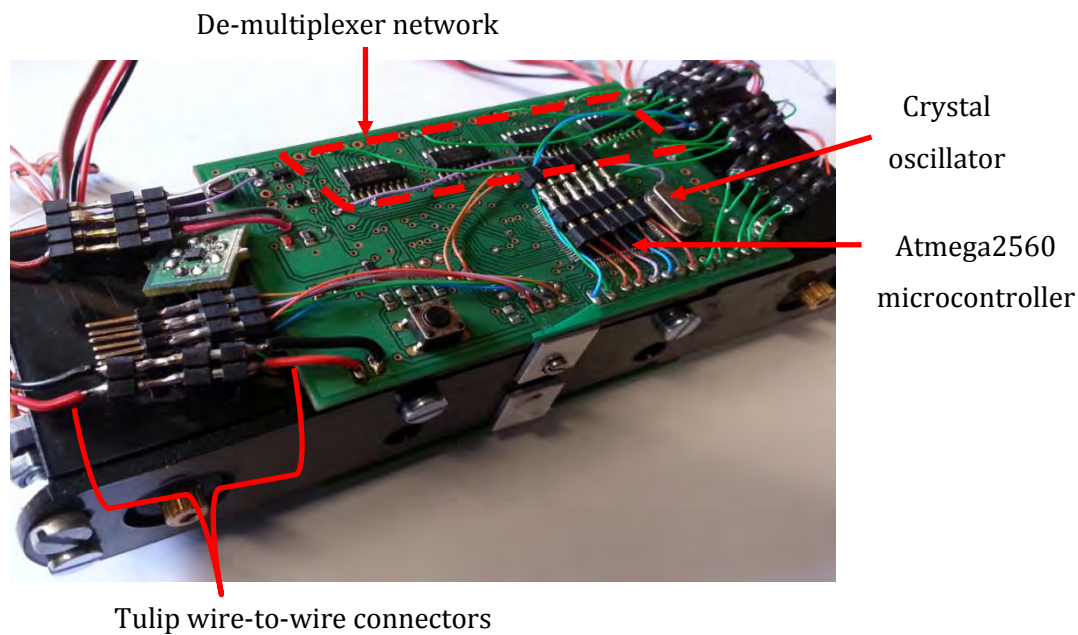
A picture of a Slave PCB mounted onto the side of a Bond module, showing the PCB's de-multiplexer network, crystal oscillator, microcontroller and tulip wire-to-wire connectors.
